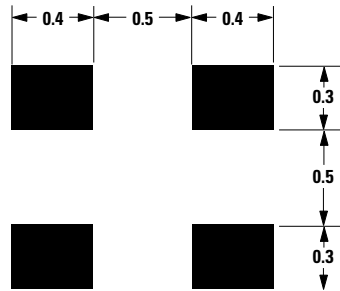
PCB Pad Layout, MiniPak (dimensions in mm).
